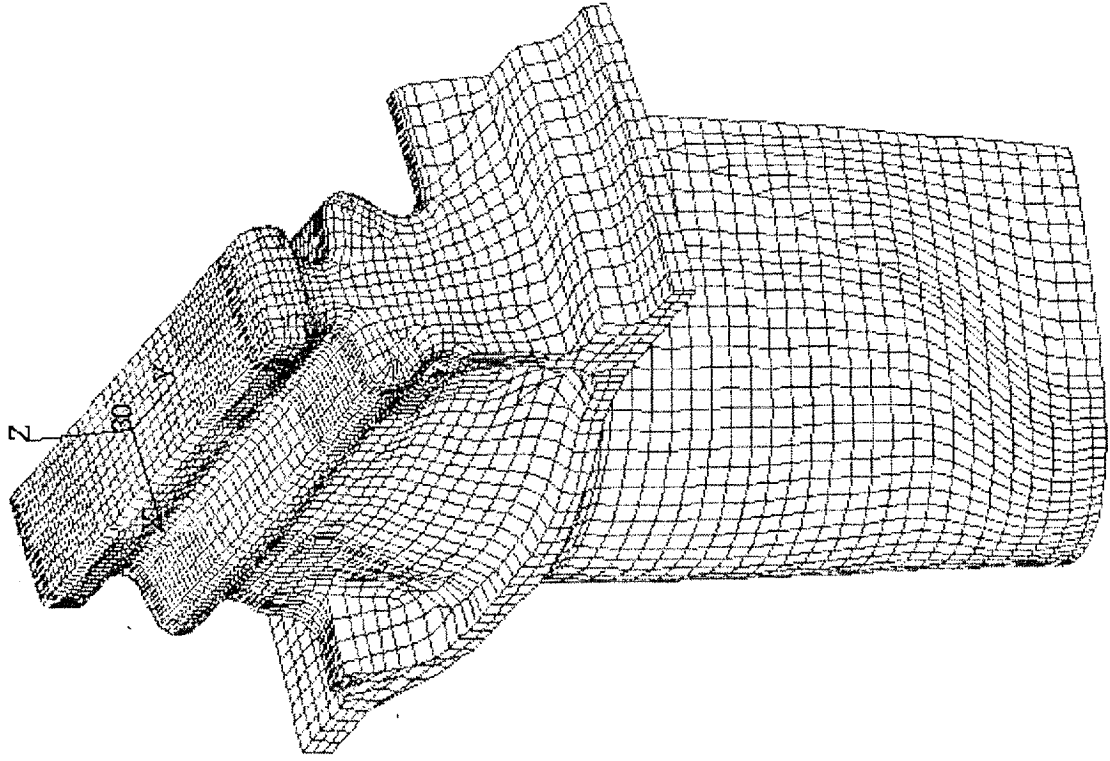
First Stage Turbine Blade FE Model and Casting Coordinate System
